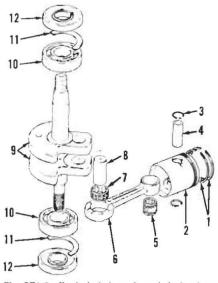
Exploded view of crankshaft, piston and related components. On 1988 and later models, thrust rings (11) are full-circle design.
